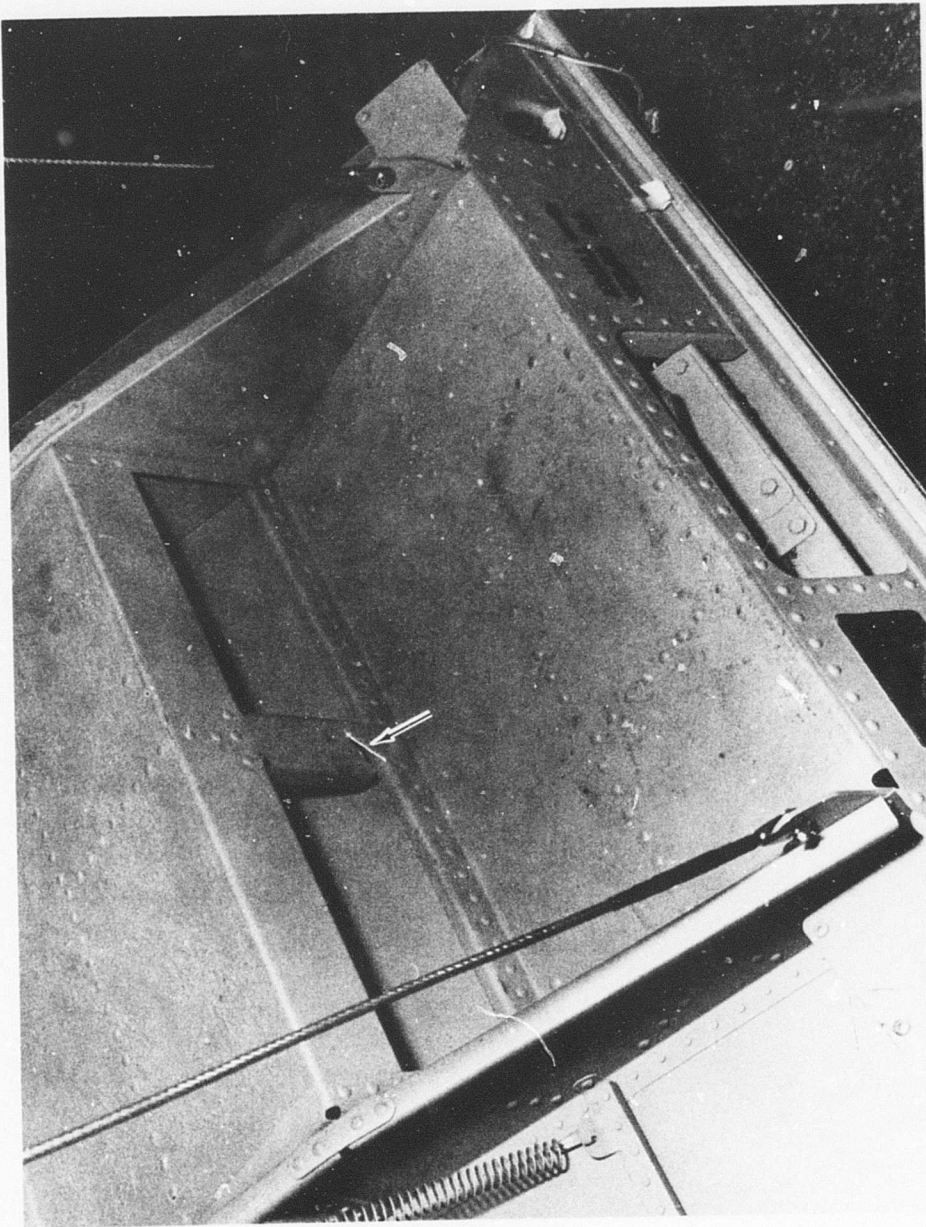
Lower Personnel Door, Original, Riser Fracture.
